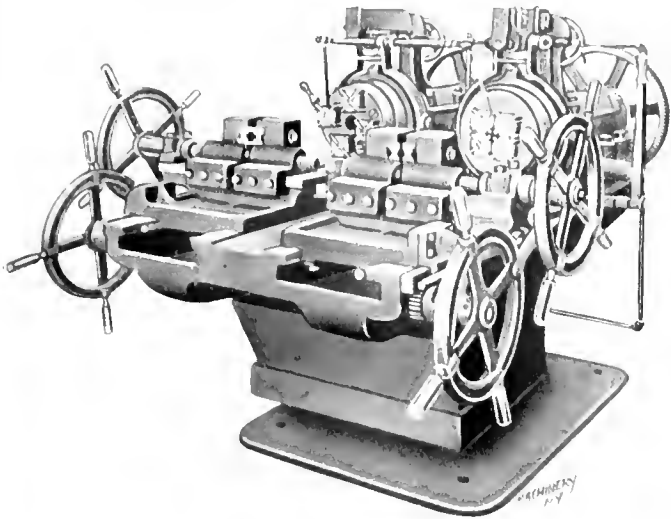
Newton Duplex Bolt Threading Machine, with Multiple Automatic Die-heads
